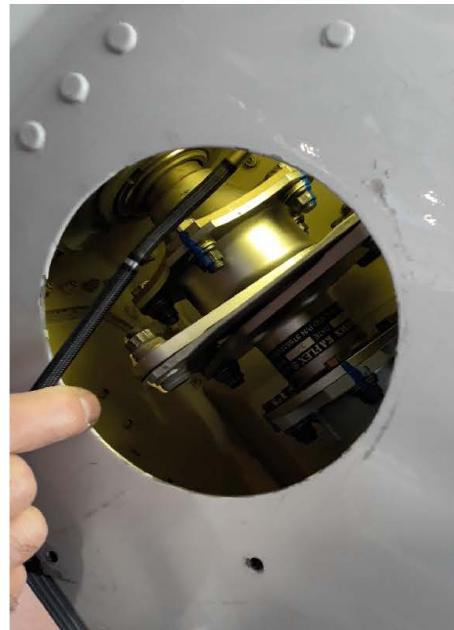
Tail section - Tail gearbox attachment structure - Detailed inspection (Sheet 3 of 5)
